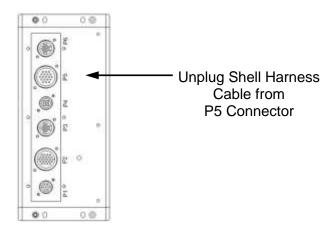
Removing Shell Harness Cable from P5 Connector on Rear Panel
